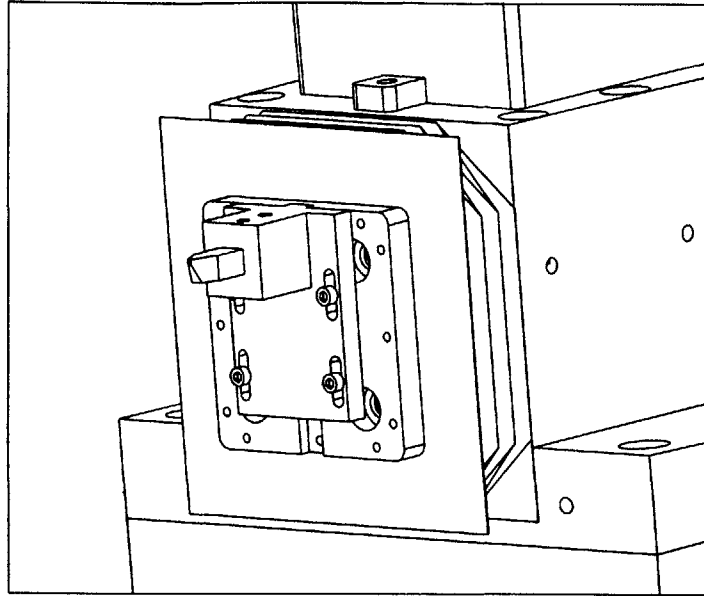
Pro-E model of a proposed toolholder/bearing seal assembly.
